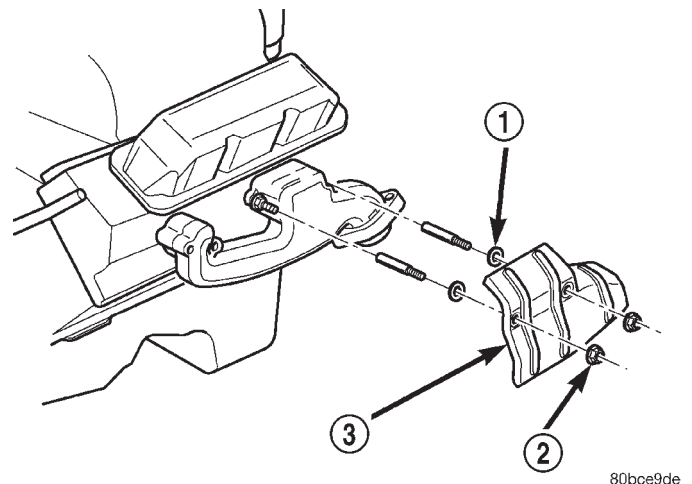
Exhaust Manifold Heat Shield—Left Side
